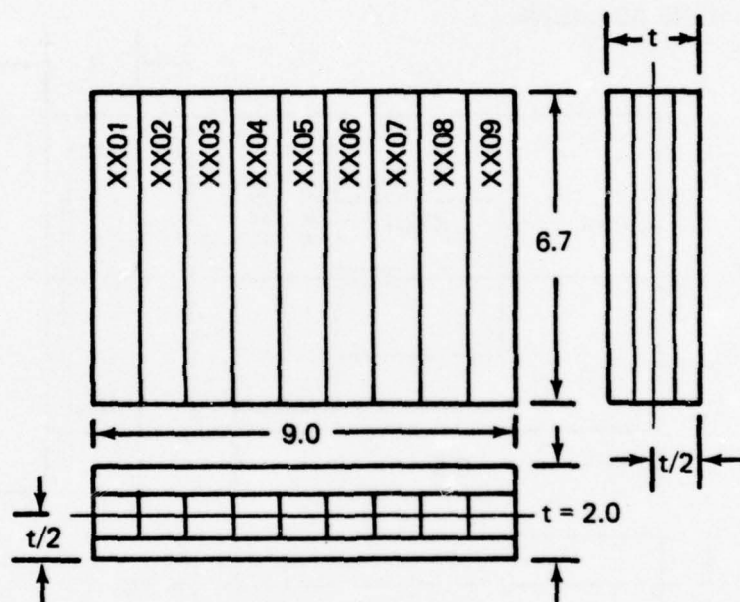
Two-Inch-Thick Forging of 7075-T73 for Specimens 0201 Through 0224.
